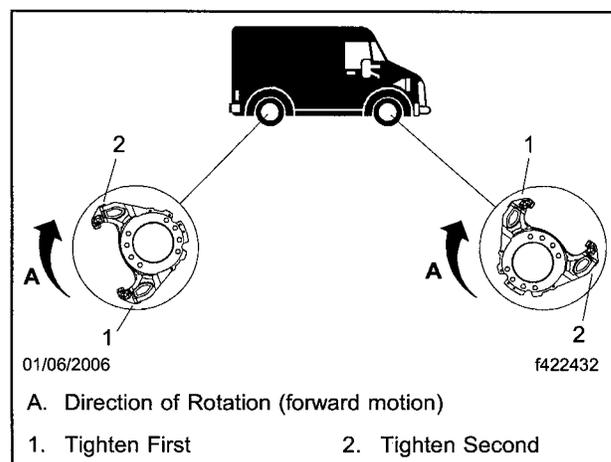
, Tightening Sequence for Caliper Mounting Bolts, Right Side
